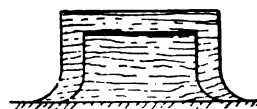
Shows how a Pattern Boss which cannot be conveniently removed is enlarged by fitting a Shell Boss over it.
